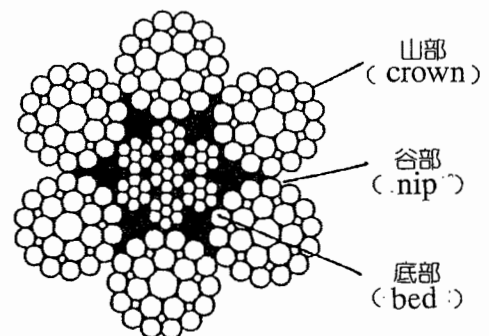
Construction of the fractured wire rope of the IWRC6 × Fi(29)
